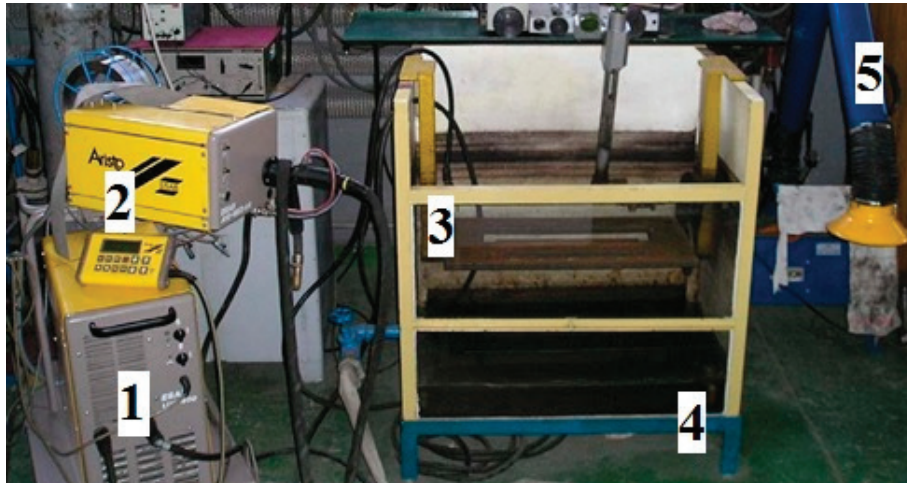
The experimental setup: 1) welding power source, 2) control panel, 3) table, 4) tank, and 5) welding extractor fan.
